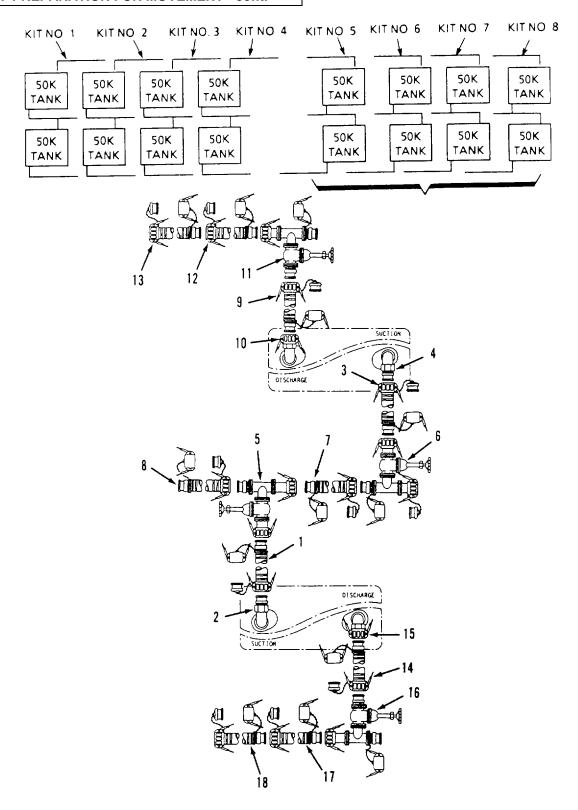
Dual Tank Connection Kit Disassembly (Sheet 2 of 2).
